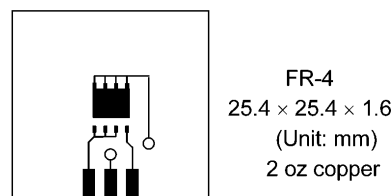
Device Mounted on a Glass-Epoxy Board (b)
